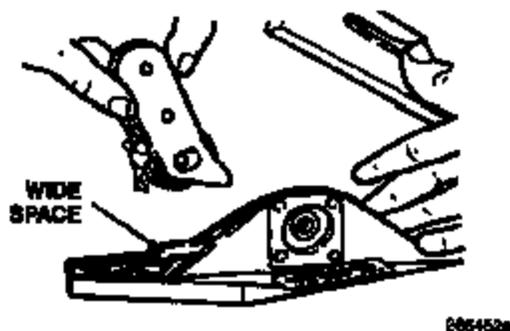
Inserting Spring Pack and Roller Assembly Into Footpad
